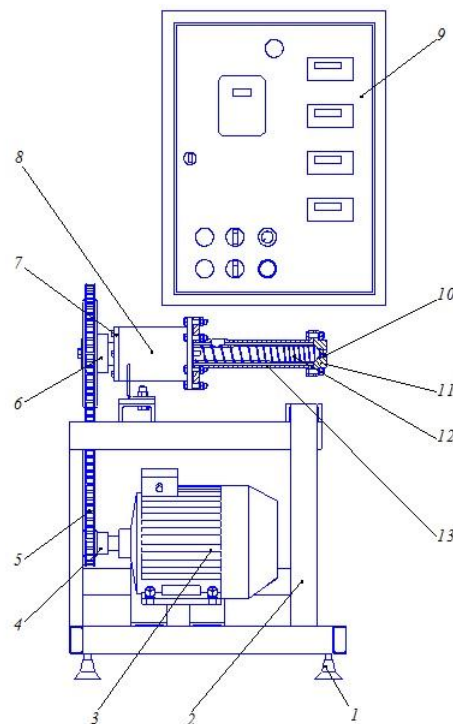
EUM-1 extruder chart: 1–adjustable base leg; 2–frame; 3–motor; 4–drive sprocket; 5–chain; 6–driven sprocket; 7–bearing cover; 8–bearing body; 9–control cabinet; 10–die head; 11–die body; 12–screw; 13–work chamber.
